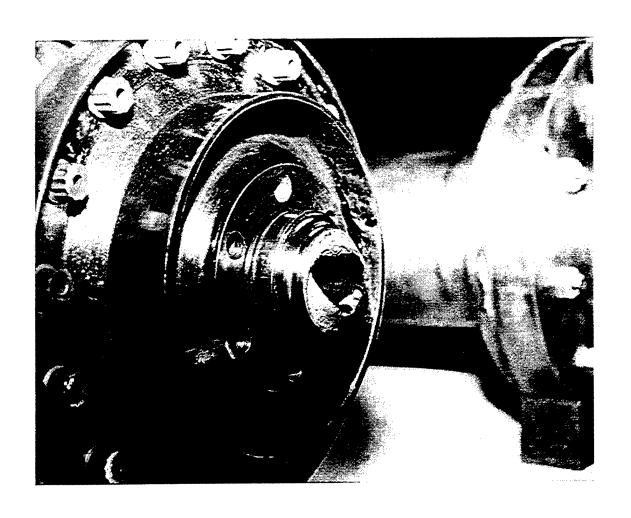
Aft portion of failed spline shaft adapter which remained with the drive system assembly.
